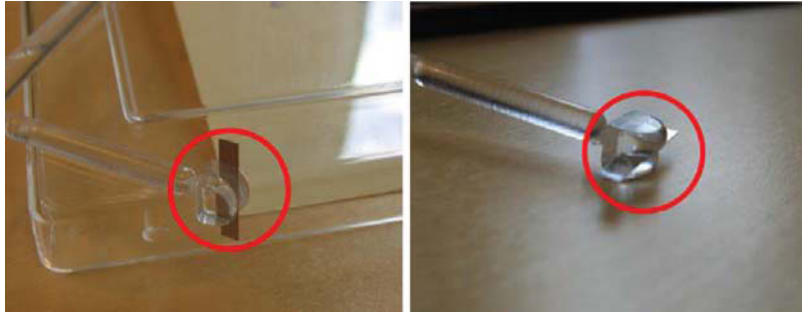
Weld lines formation due to the presence of an insert in the cavity during insert molding [8].
